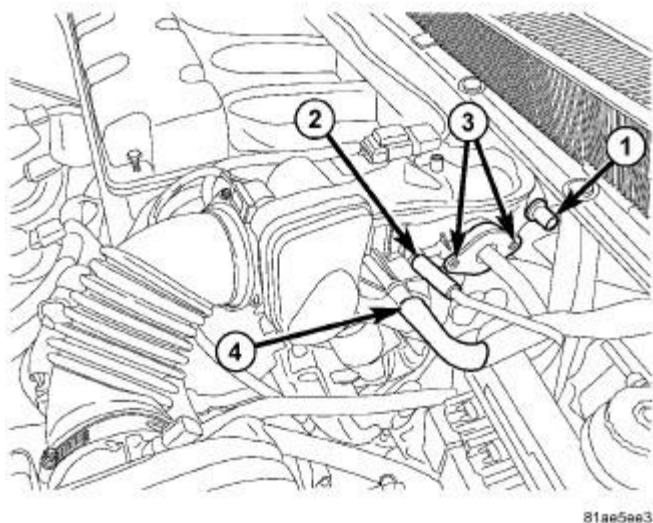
Locating Manifold Tuning Valve, Short Runner Valve, TP Sensor & MAP Sensor Connections
